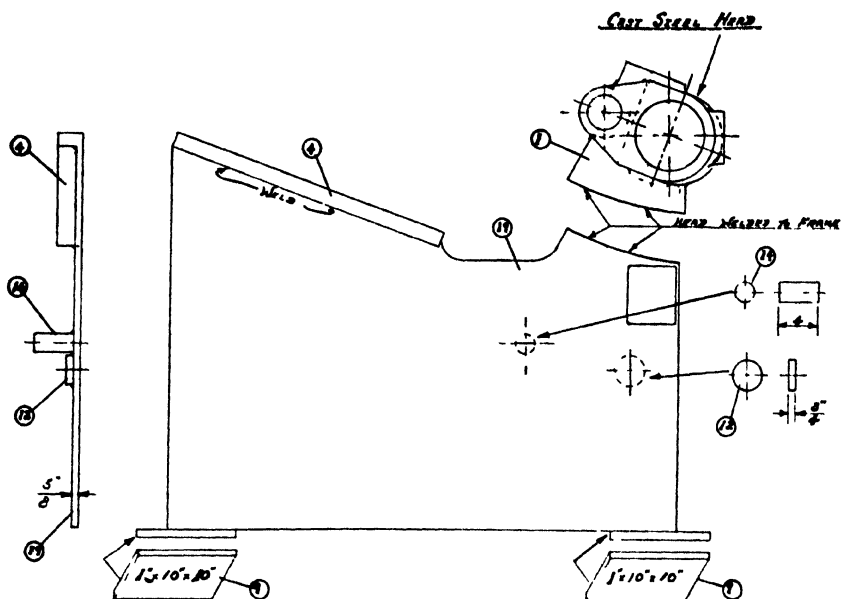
Dimension drawing right-hand side view welded construction.
